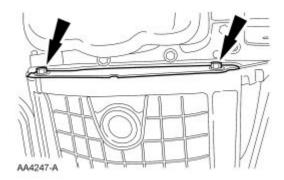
Locating Flexplate Inspection Plate Bolts Courtesy of FORD MOTOR CO.
